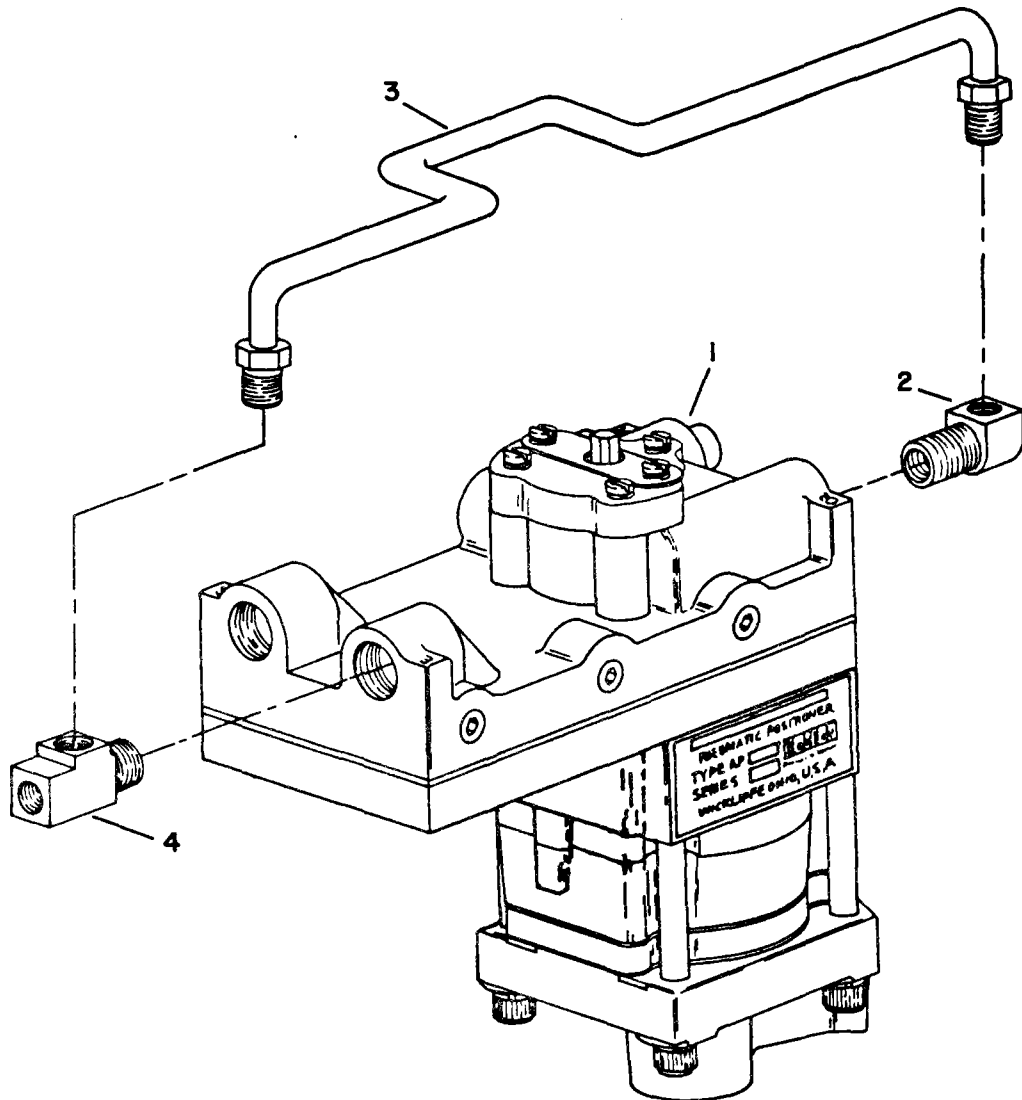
Parts Drawing P88-28, Optional Mounting Kit, Pt. No. 5327321-□
